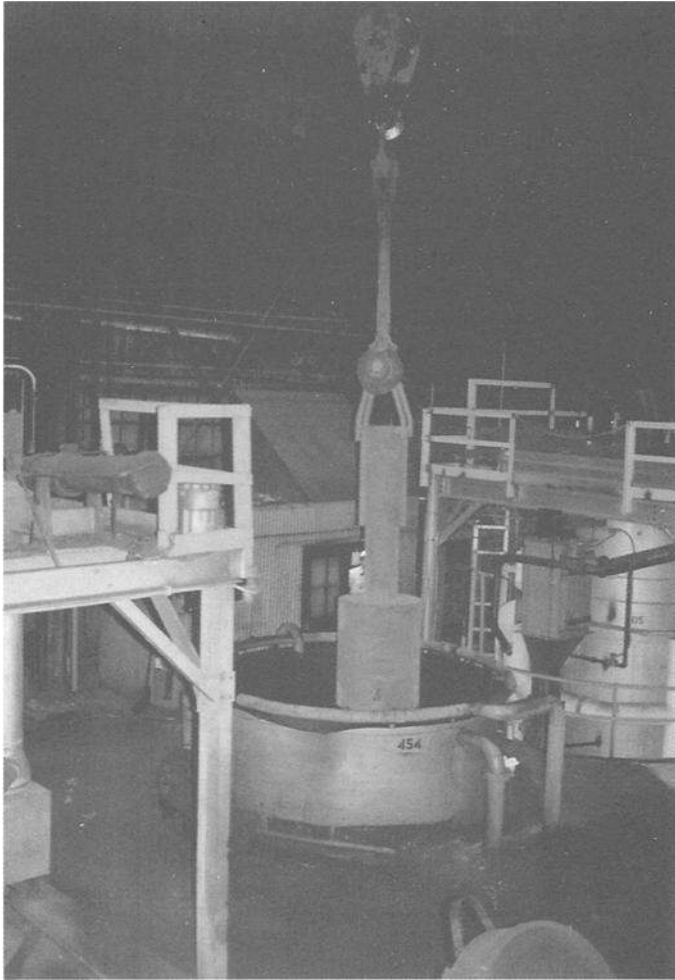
A similar alloy steel forging to that shown in Fig. 9.4, but fitted with two type 316 austenitic stainless steel bales to reduce the heated weight and keep heat treatment rigging clear of the forging. A compressed air cylinder used to operate the vertical furnace doors is visible to the left foreground.
